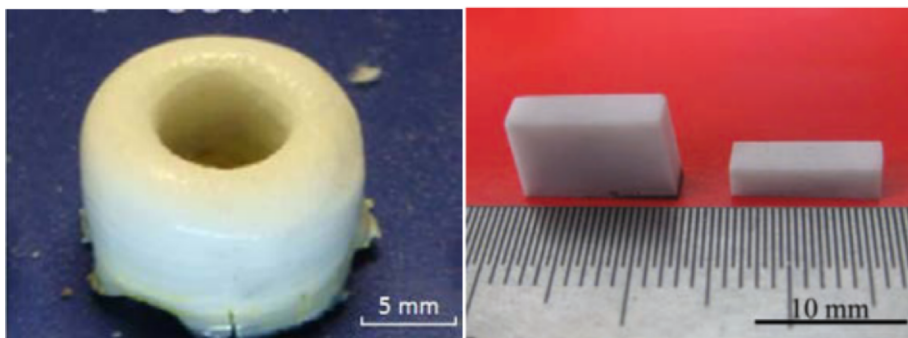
Hollow cylinder structure fabricated by LENS (LEFT) and rectangular samples machined from the fabricated specimen (RIGHT) [324].
